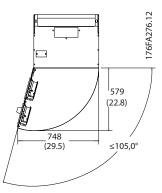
Front Clearance of IP21/IP54 Enclosure Type, Frame Size E1.
